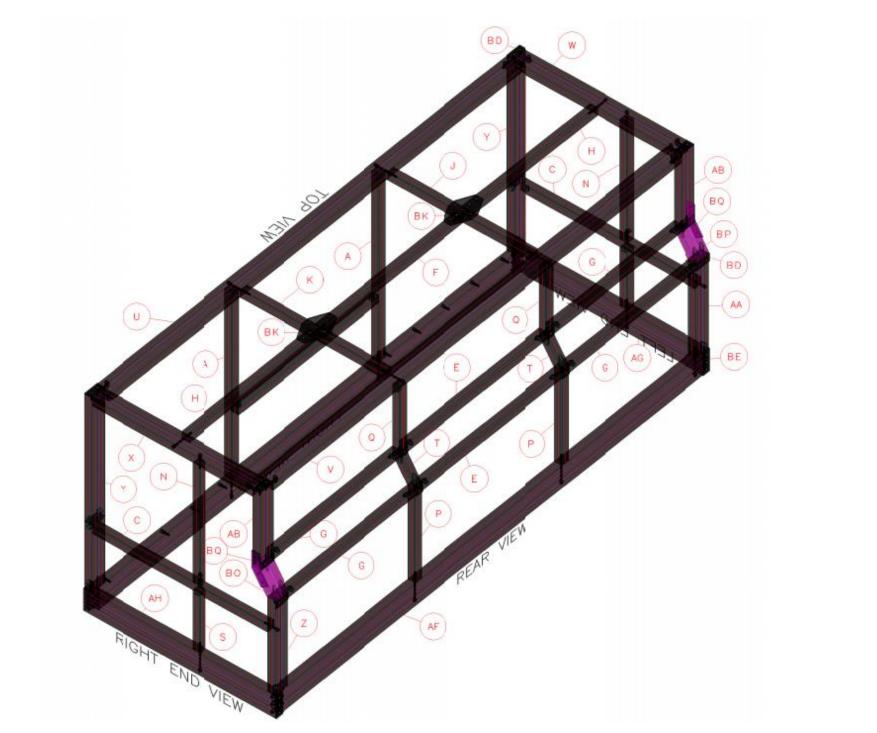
Complete He Enclosure, Currently assembling and mounting in parts
